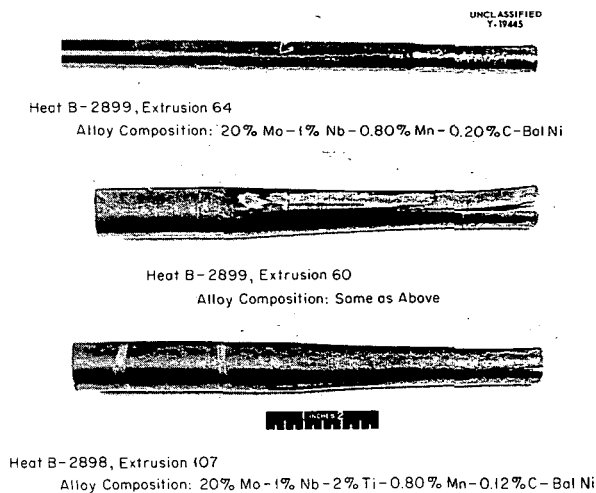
Failures in Tube Blanks During Cold Reduction.
